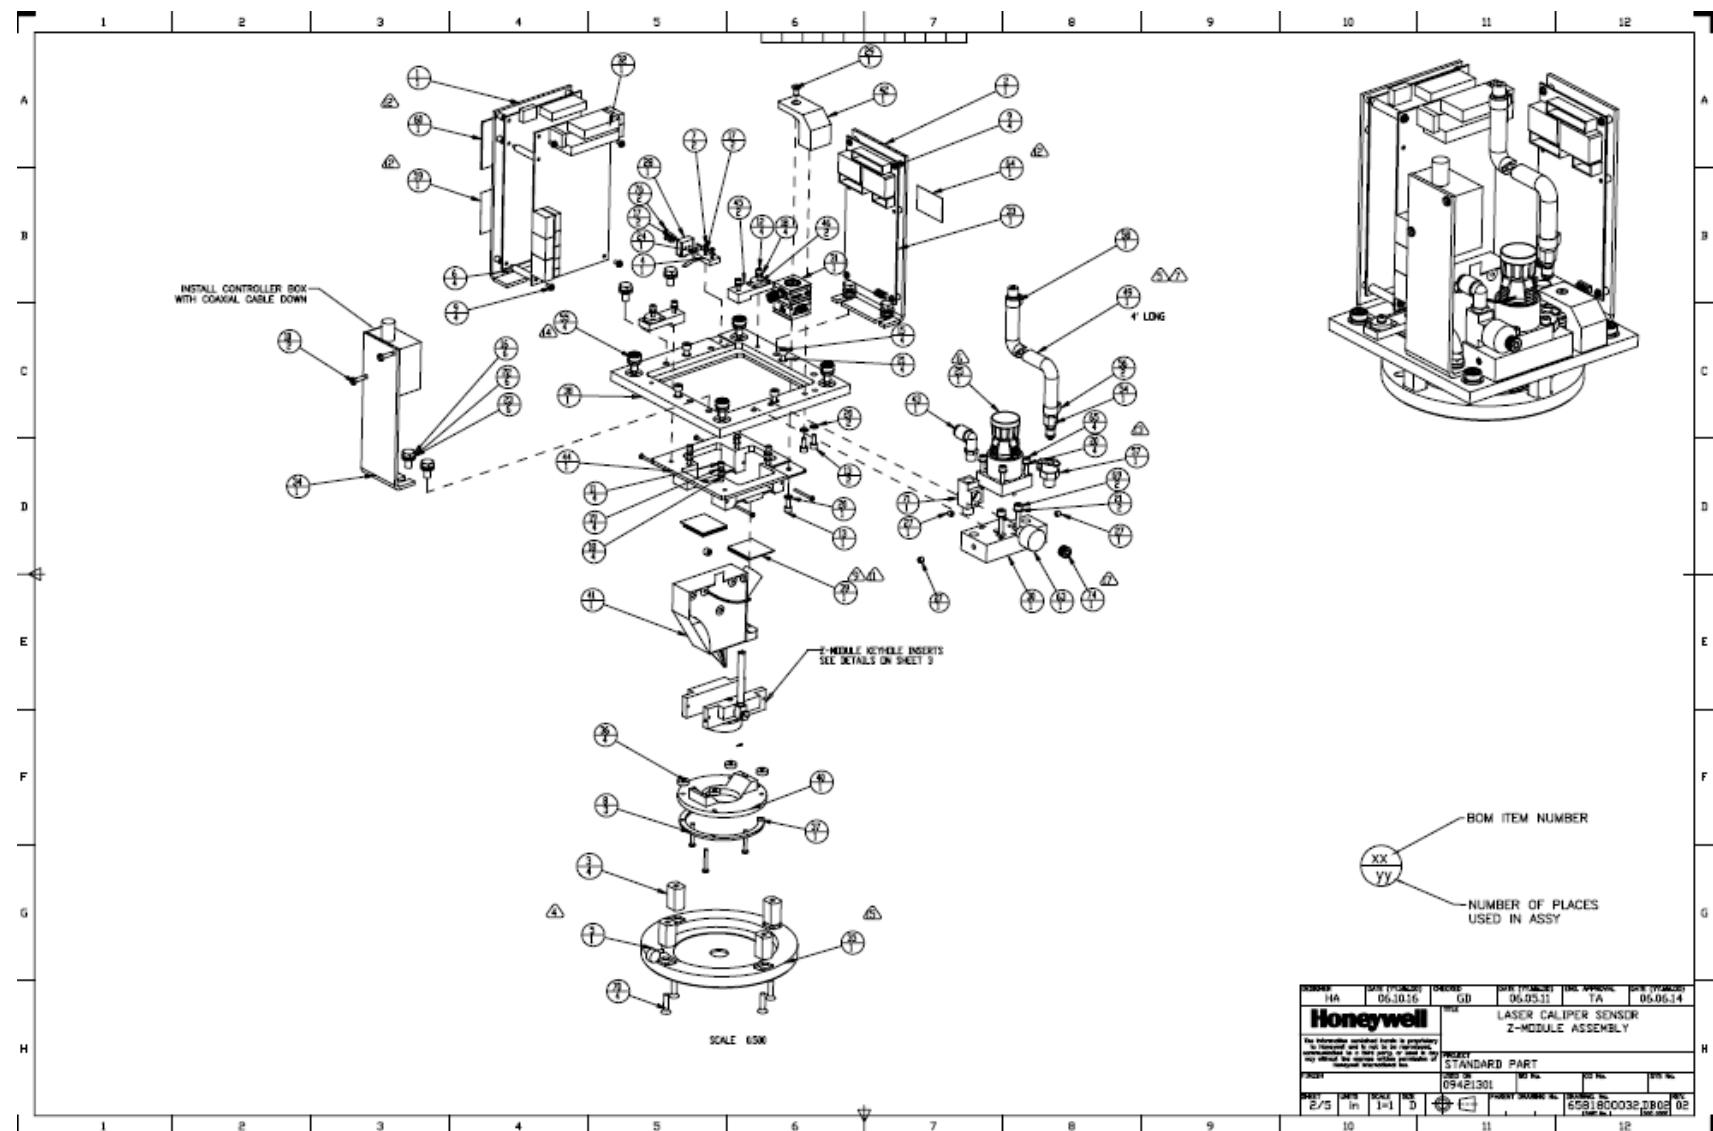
6581800032: laser caliper sensor z-module assembly (2/5)
